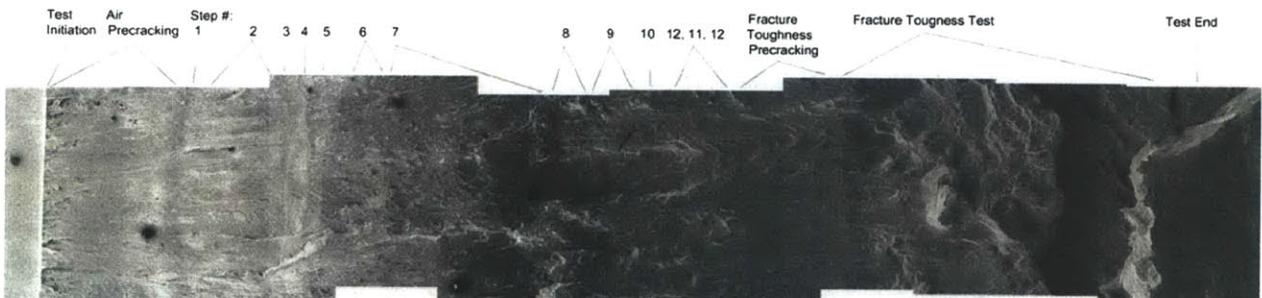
Fracture montage for the high-ferrite, as-welded material in sample 238.
